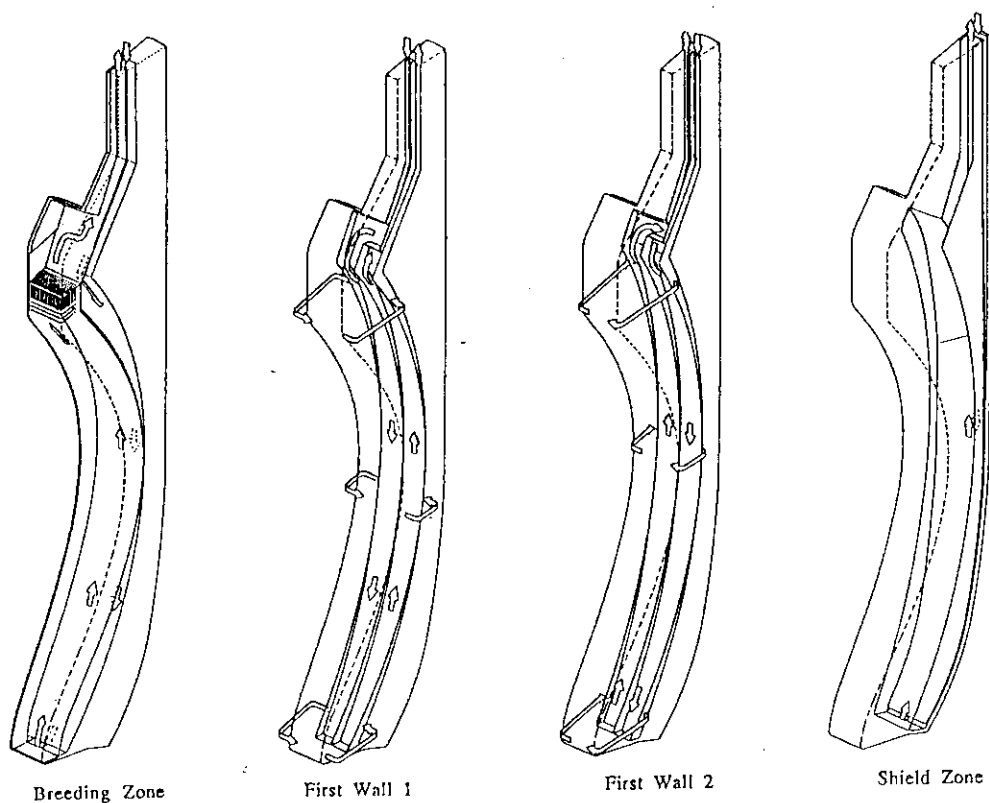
Manifolding and coolant flow concepts for outboard side module (mixed pebble bed blanket)
